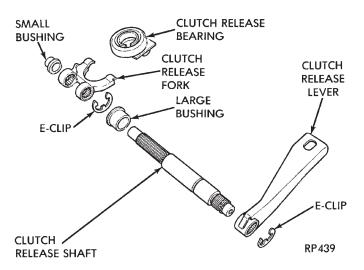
Clutch Release Shaft Components INPUT SHAFT OIL SEAL
